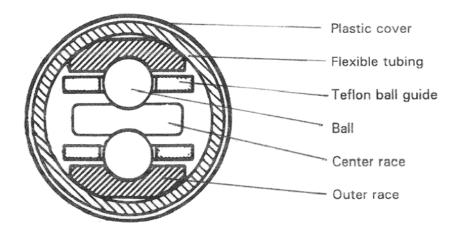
Typical Cross Section of Throttle Cable Assembly Design
